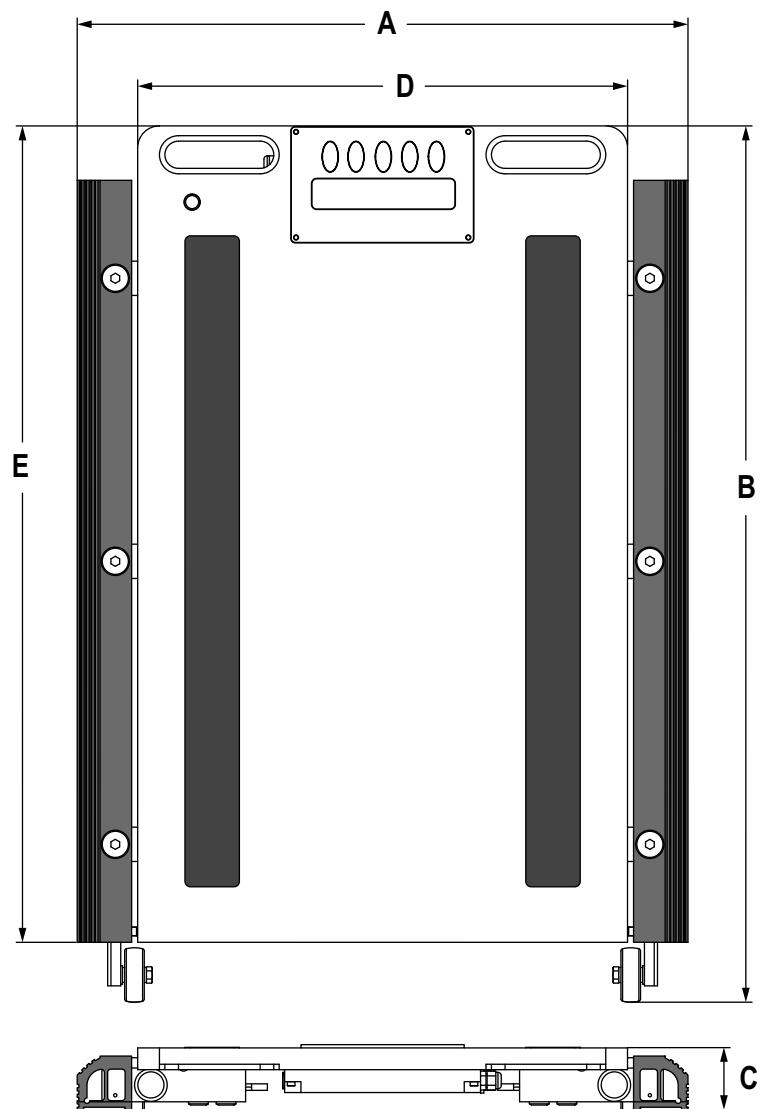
Wheel Weigh Pad Dimensions Diagram
